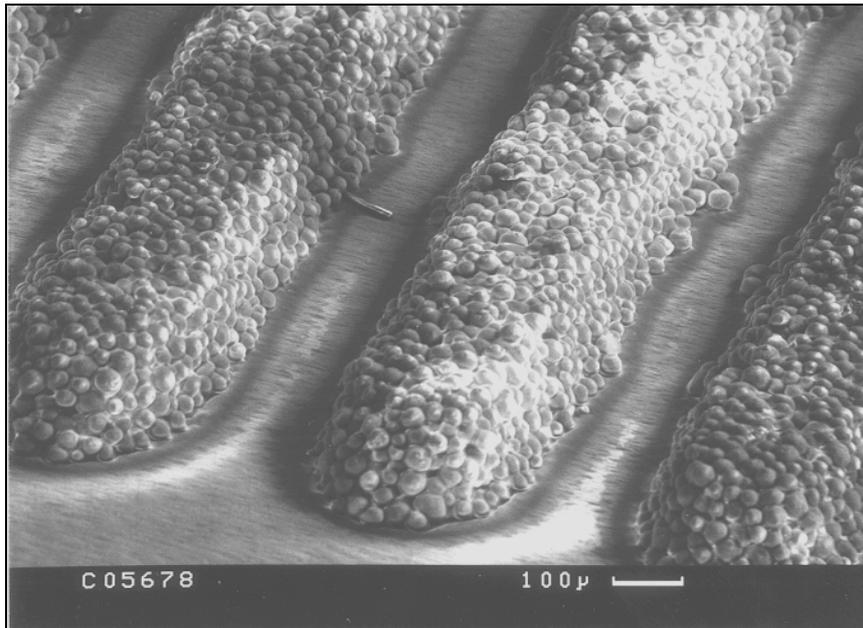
Solder paste deposits stencil-printed on Cu substrate
